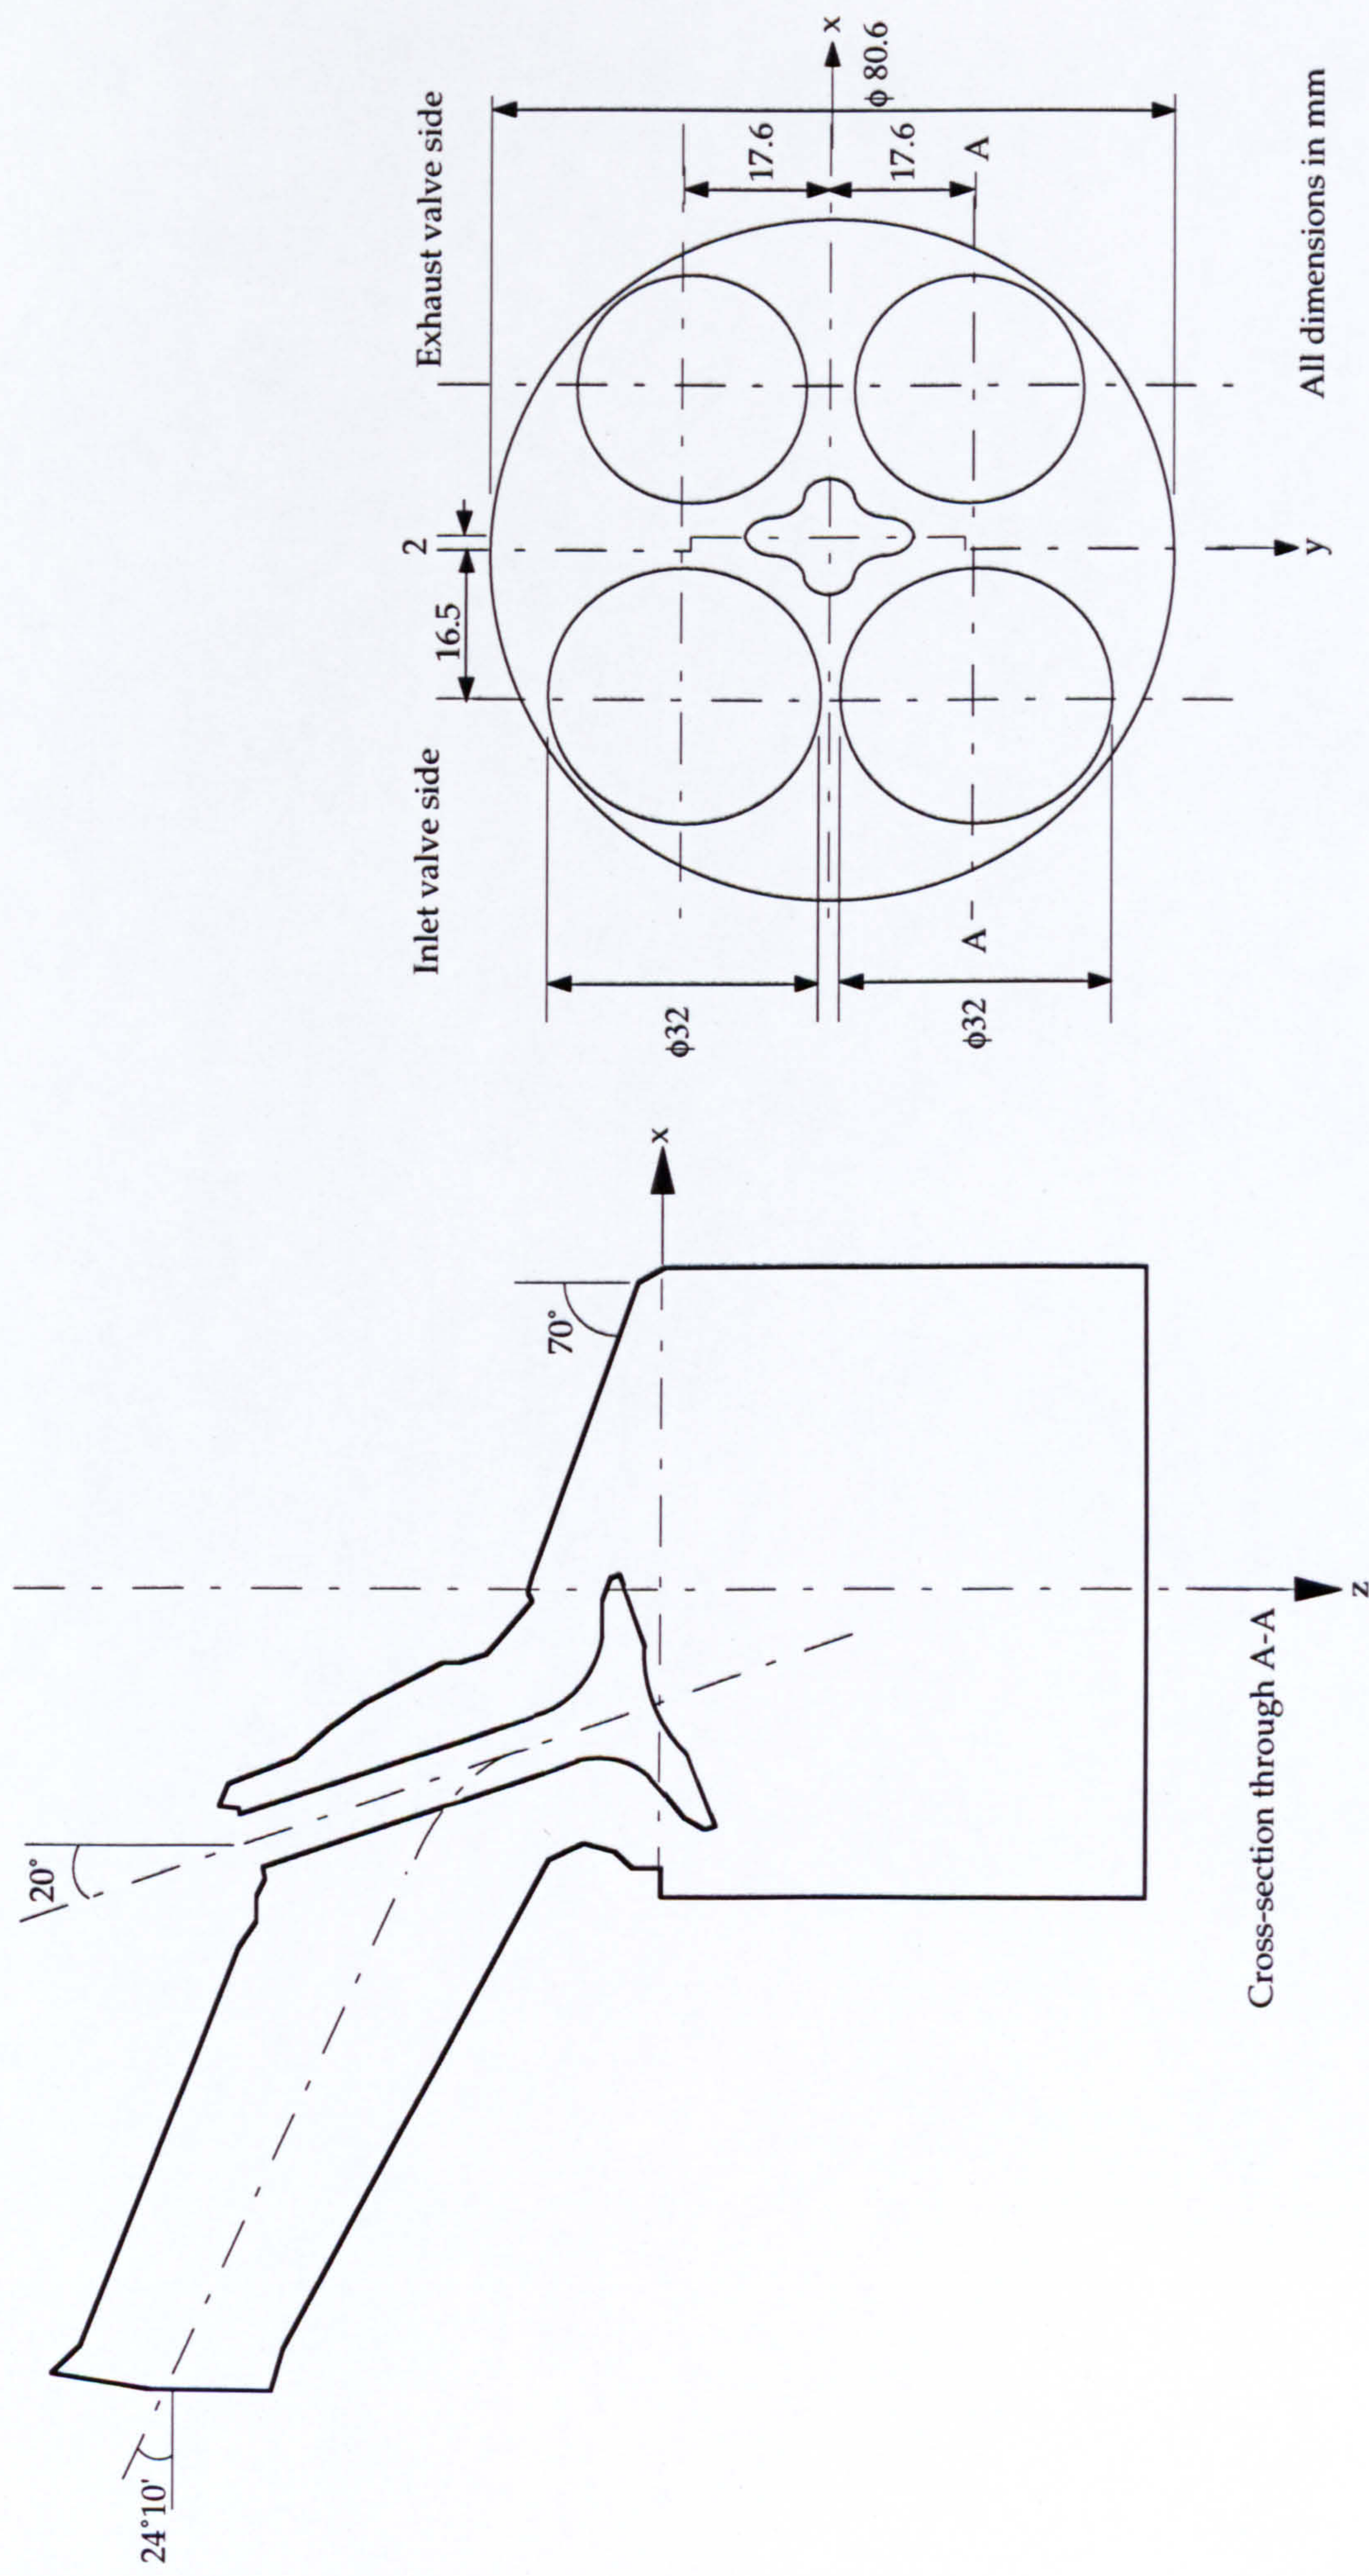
Outline of the Ford Zetec engine intake port in a vertical plane through the centre of one inlet valve and major cylinder head dimensions
